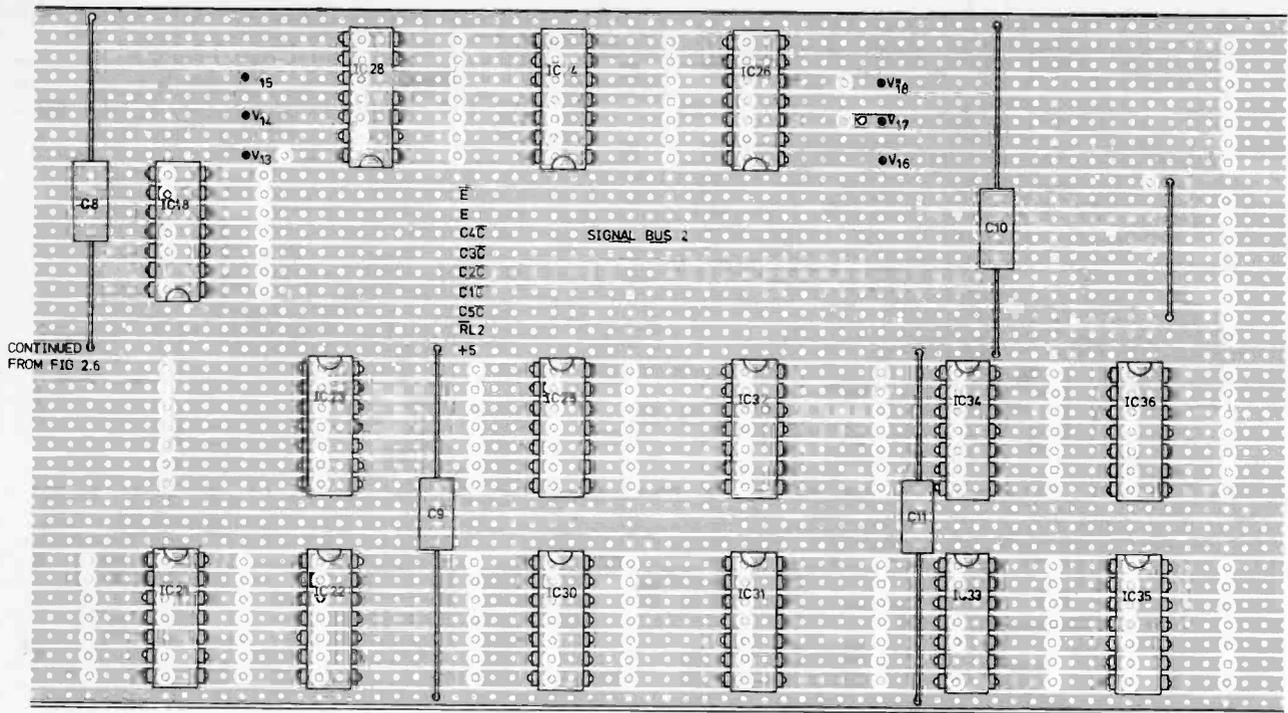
Prototype components layout for the middle third of the main board (section B in photograph). To assemble this constructors should work from the circuit diagrams
